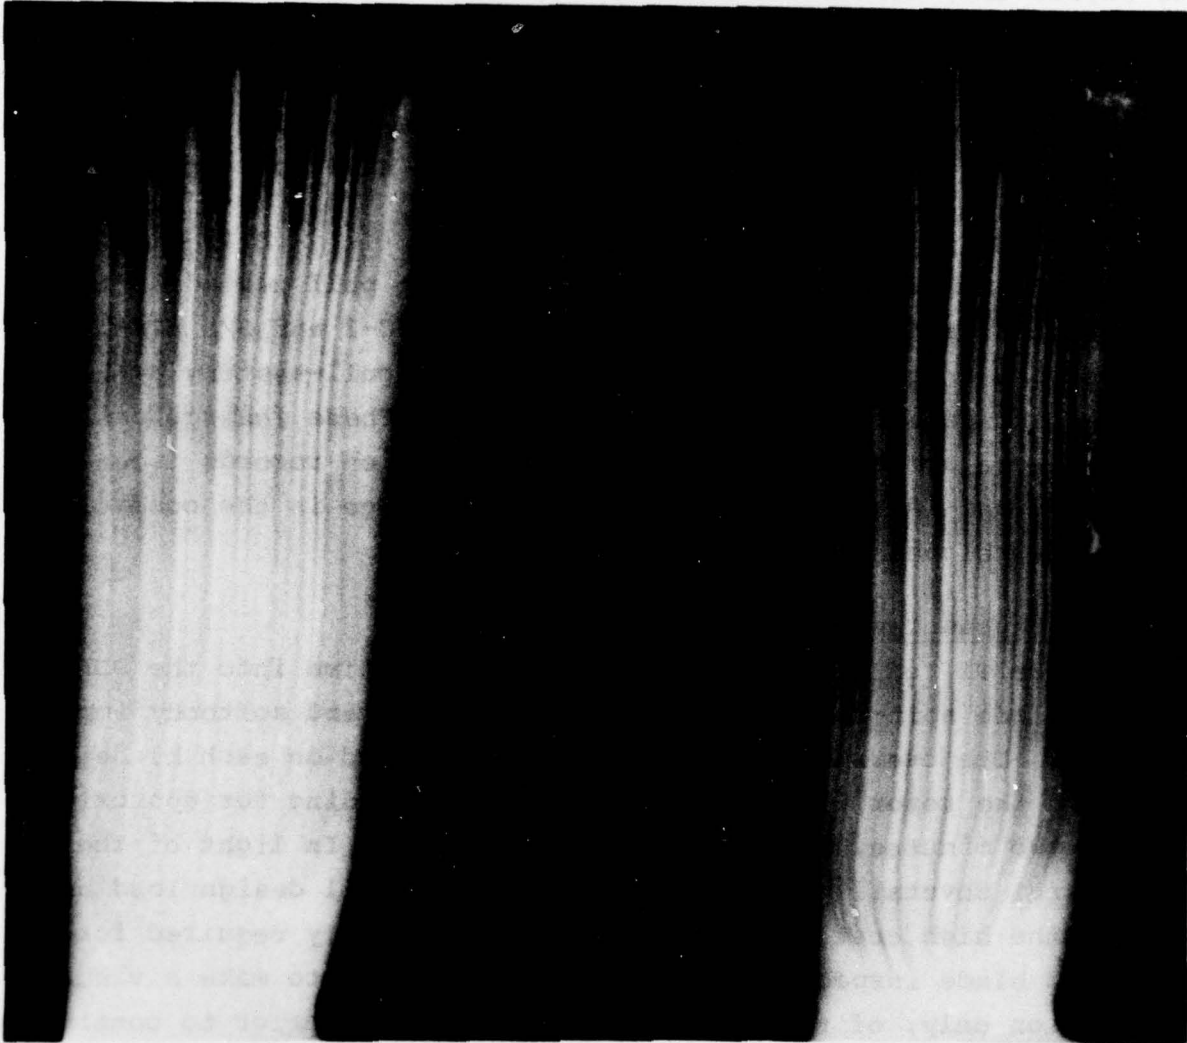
Radiographs of Be Rod/Ti Composite blade E24-1 after finish machining.
